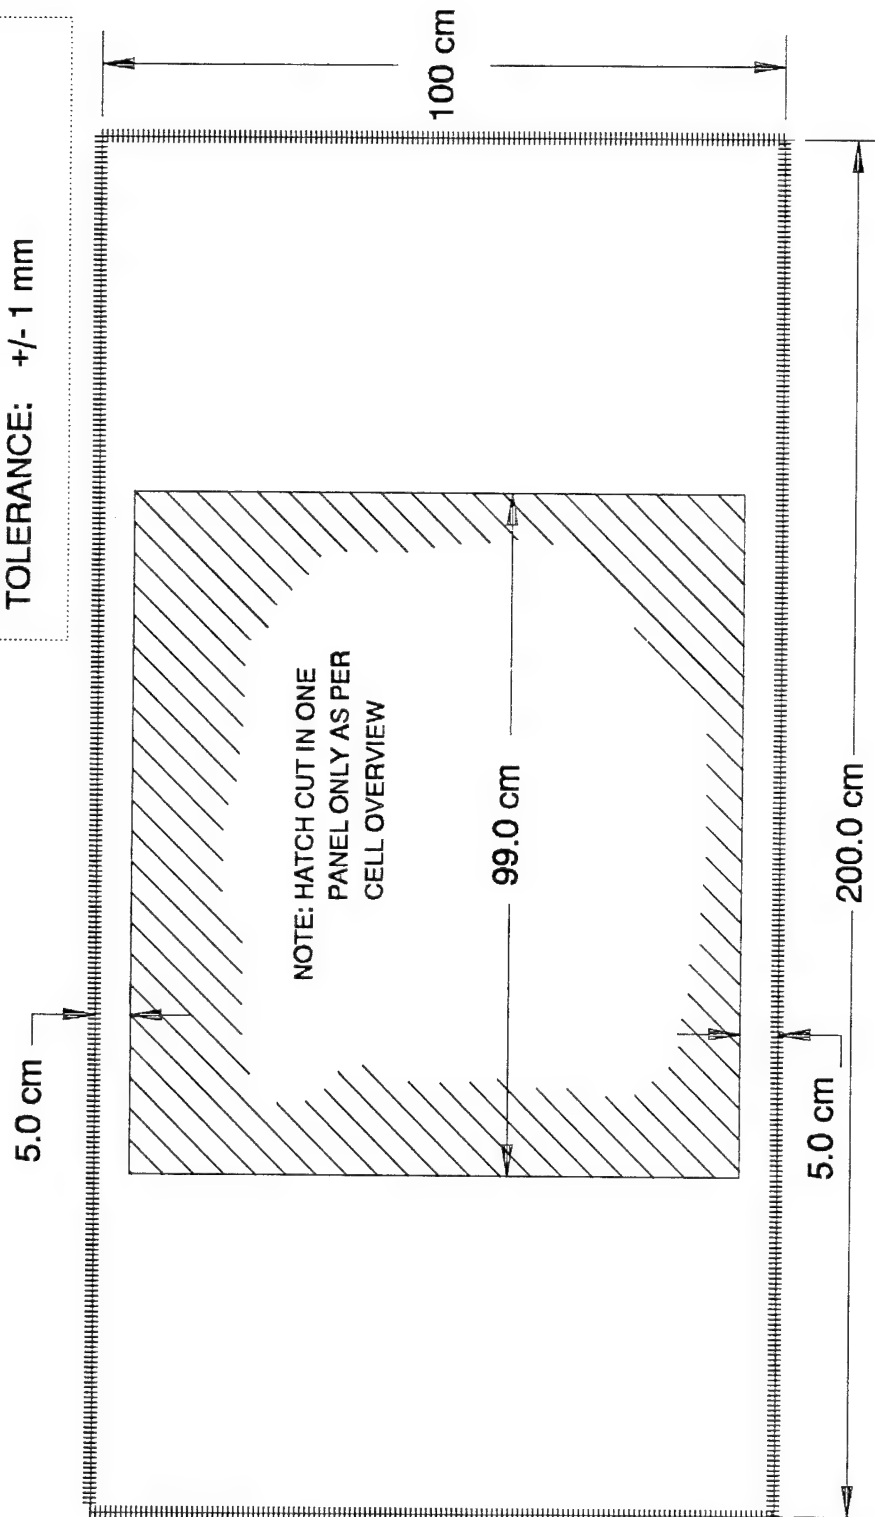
Detail of the panel located at the top and bottom of the central portion of the cell. The cross-hatched edges represent the edges that are mounted with a flange lip as described in Fig. 10. The remaining edges act as a receptacle for a flange from another panel.
